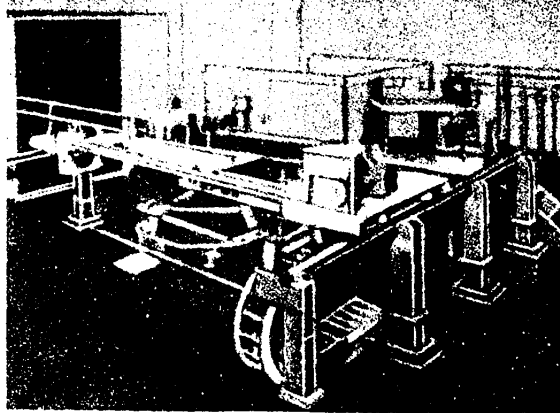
CAOS/XY type machine tool surfacing parts up to 2.5 meters in diameter
